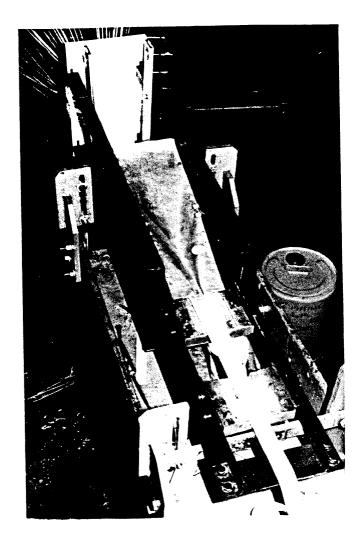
Pultrusion overview of open die halves and fabric fold tooling.
